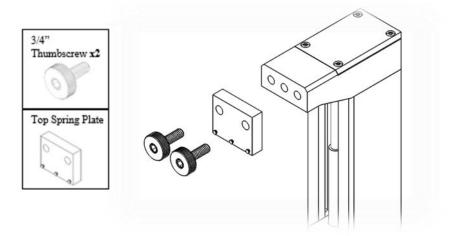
Attachment of Spring Plate to the Load Cell and Top Mount
